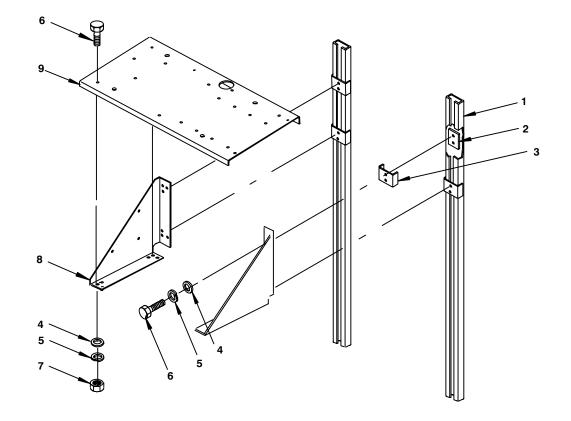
(2). Electrical Equipment Shelf Installation: Alternate Installation A
